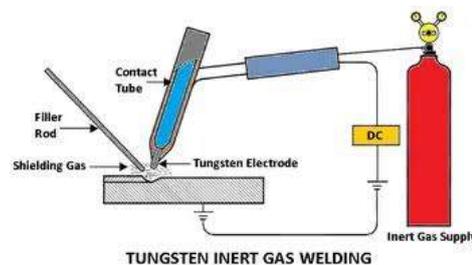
TUNGSTEN INERT GAS WELDING.
